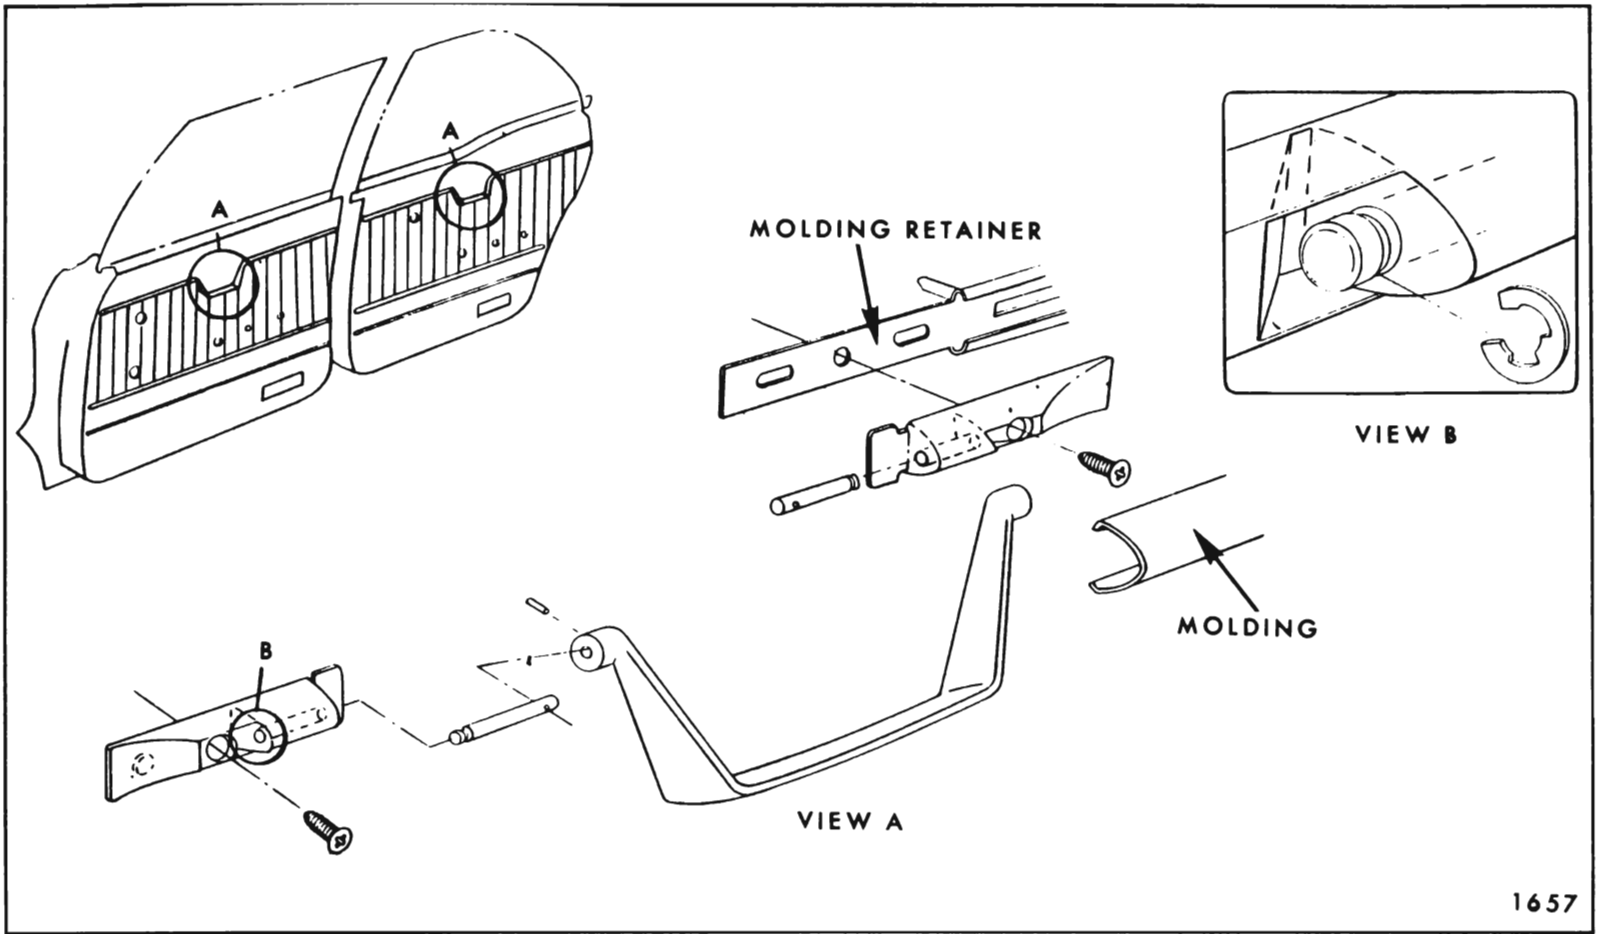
Door Pull Handle Installation - 26239 Style
